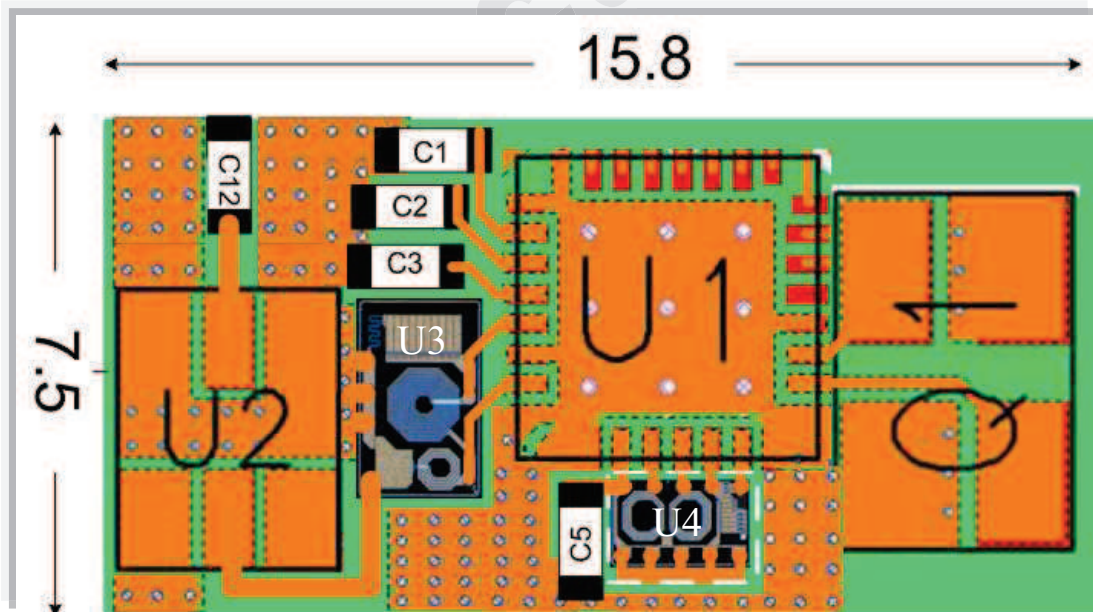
Platform PCM layout with ASPIC320.606 & ASPIC320.604/5 & SX1211 (top view)
